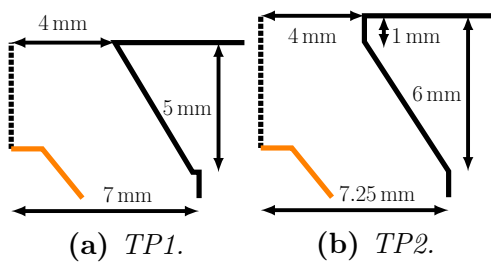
Design of the terminal plate (gold piece in Fig. 1.6). The atomizer is shown in orange for reference. Version TP1 is used with swirlers "TIMBER" and K, version TP2 with all other swirlers.
